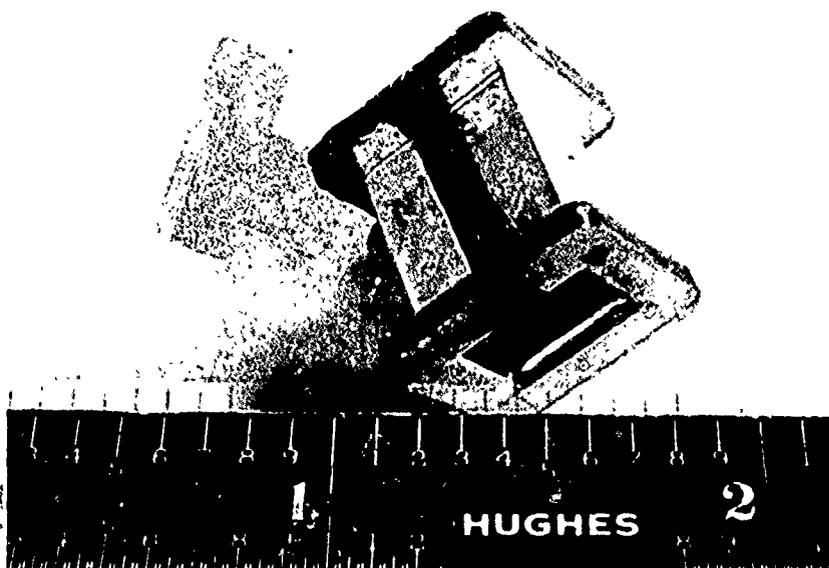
Molded bobbin with equipotential surfaces of vacuum deposited alumina.
